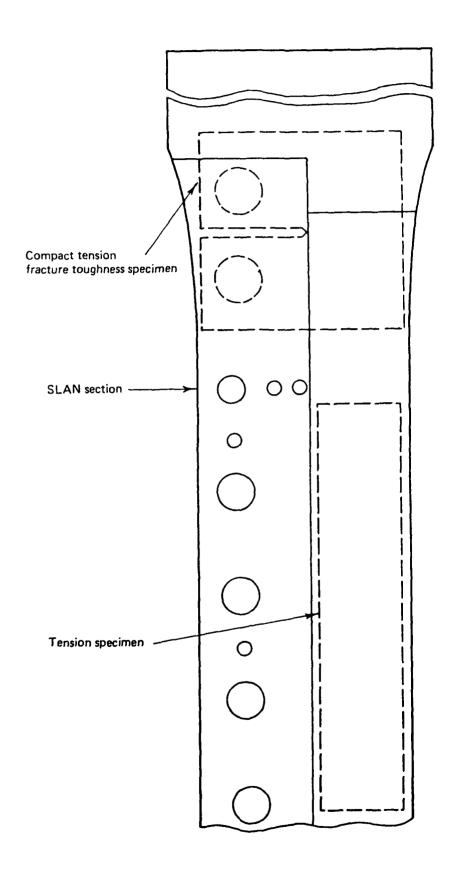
LOCATIONS OF TENSION AND FRACTURE TOUGHNESS SPECIMENS
